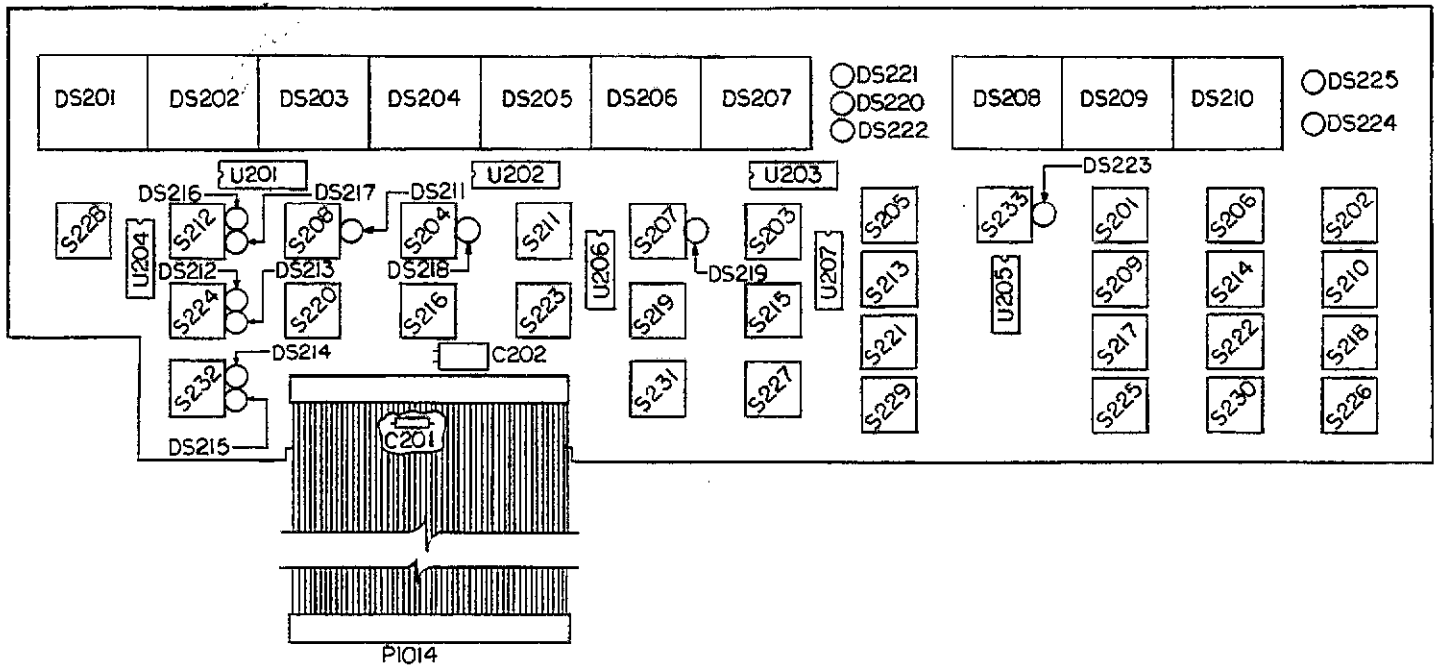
Display Board, Component Location Drawing, Dwg. No. 590-110
